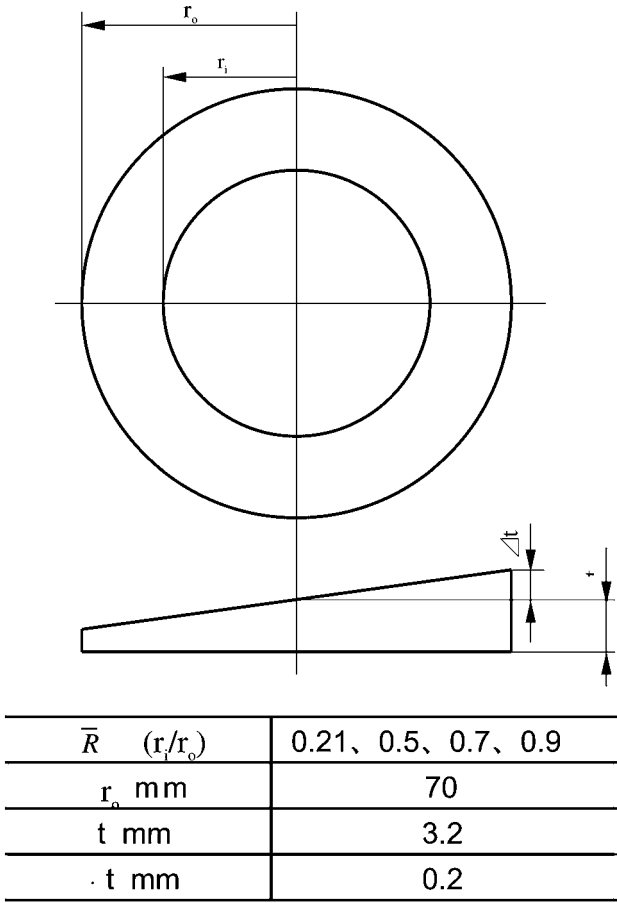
Shape and dimensions of the C/C rings used for spin burst tests.
